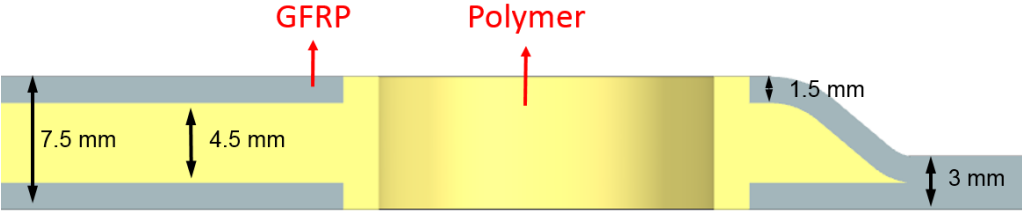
Cross sectional dimensions of the composite laminate with metal-polymer insert
